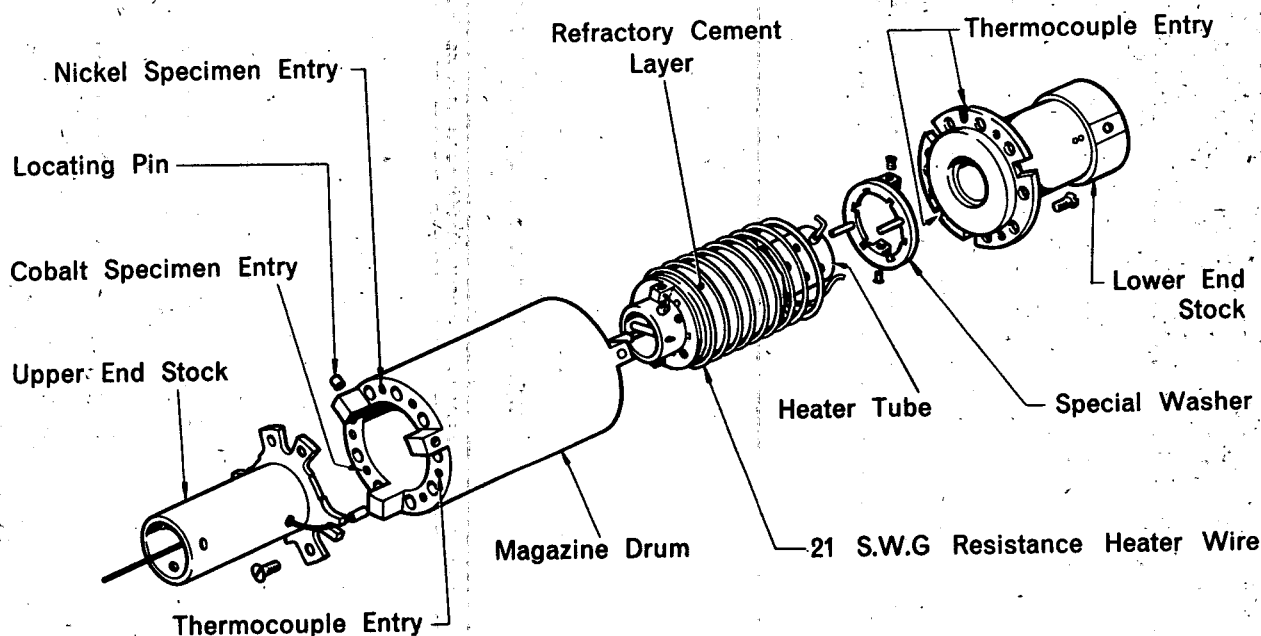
Non-Fissile Materials Irradiation Rig - Exploded view of Magazine Drum
